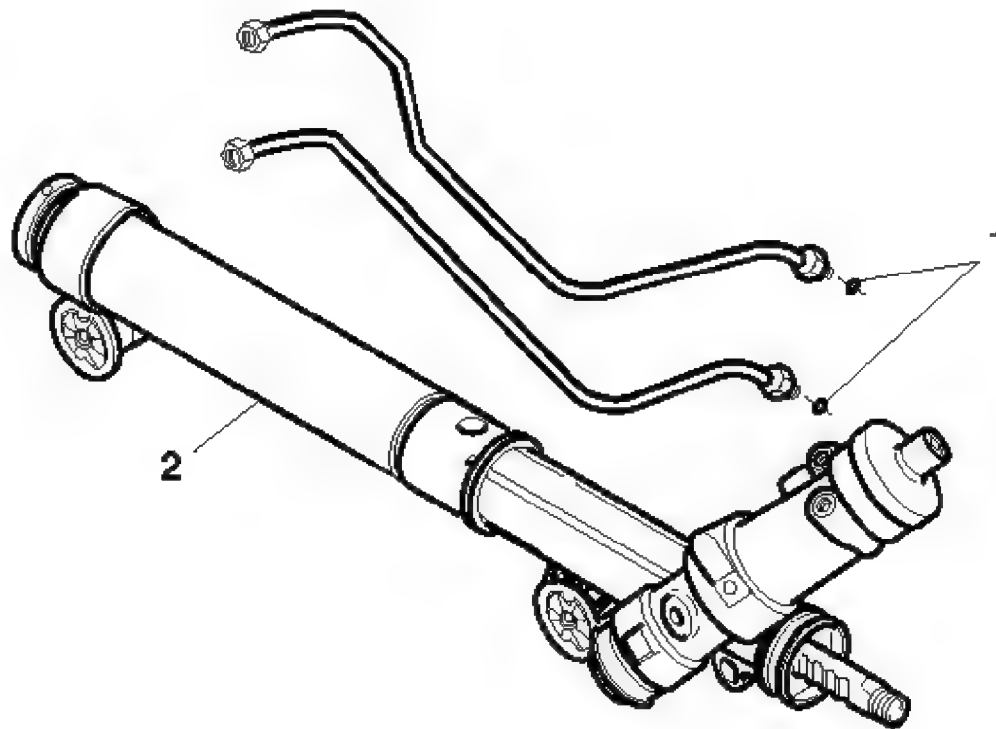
View Of O-Ring Seals At Valve End Of Lines (Quiet Valve)
